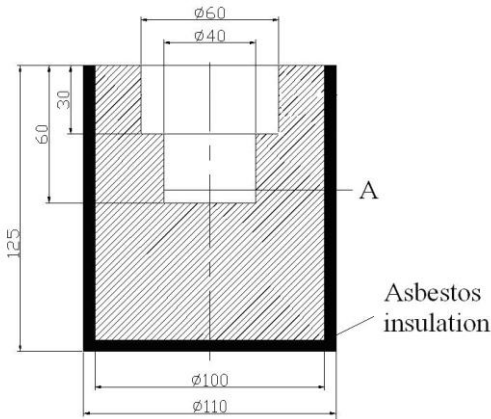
Shape and dimensions of experimental casting mold (mm).
